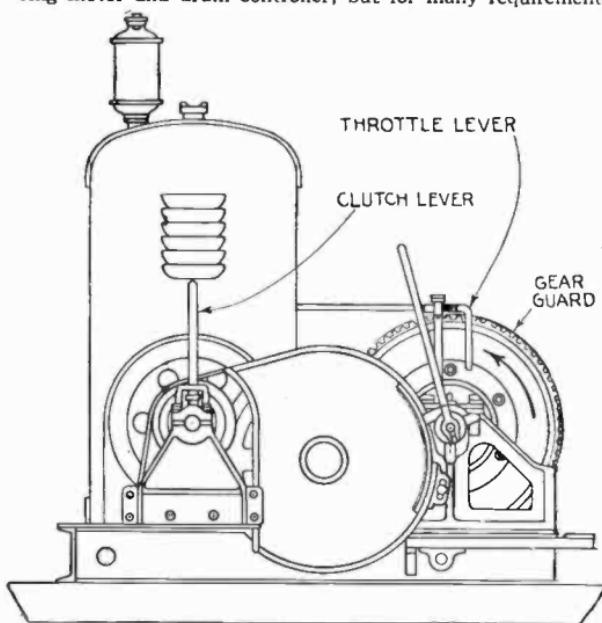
,852.—Novo gas engine driven hoist powered with four cylinder engine, radiator cooled. The engine has two fly-wheels, which approximates steam engine flexibility. With an engine equipped with two fly-wheels, when handling a concrete tower elevator, the engine may be throttled and the load will float to the proper stopping point without stalling the engine. This makes faster and more efficient hoisting.
